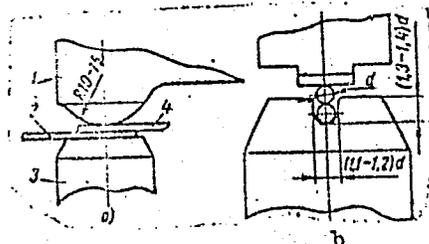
Welding head geometry for wire-to-plate (a) and wire-to-wire (b) welds: 1- instrument, 2- plate, 3- reflector, 4- wire
